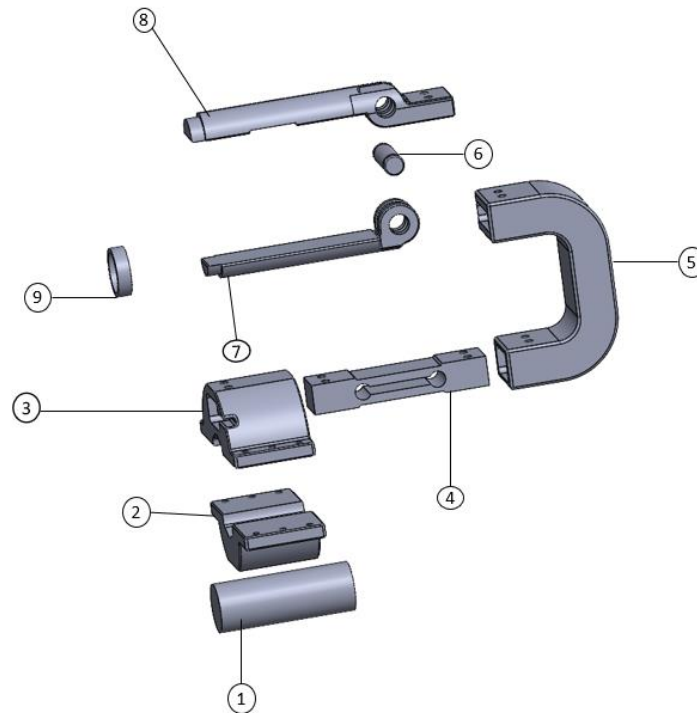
Prototype's exploded view. (1) Tube; (2) Clamping device's lower part; (3) Clamping device's upper part; (4) Single-point load cell; (5) Connector component; (6) Pin; (7) Handle's lower part; (8) Handle's upper part; (9) Controlling component.
